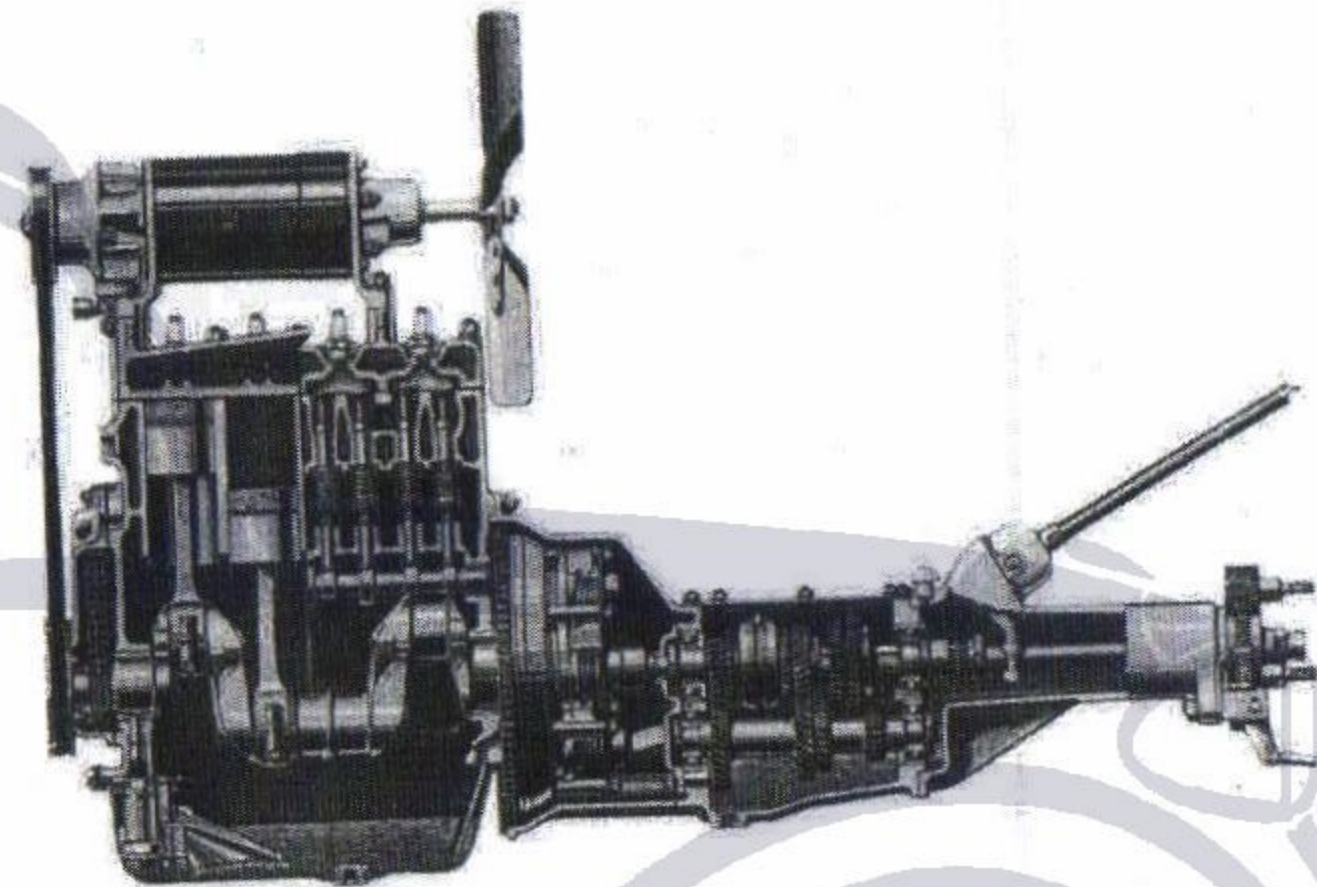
Longitudinal section of the mechanical units: engine - clutch - gearbox.
